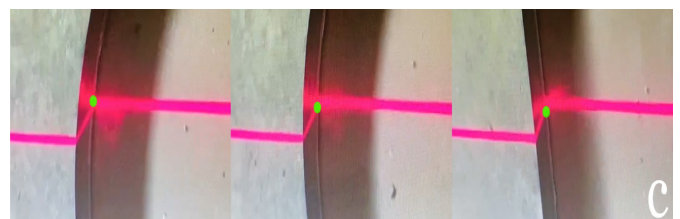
The test results of laser weld seam tracking for the circular lap joint
